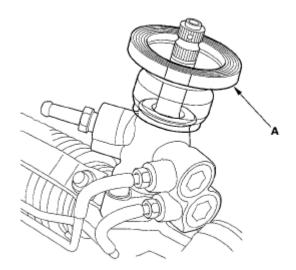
Removing Pinion Shaft Grommet From Top Of Valve Body Unit Courtesy of AMERICAN HONDA MOTOR CO., INC.
